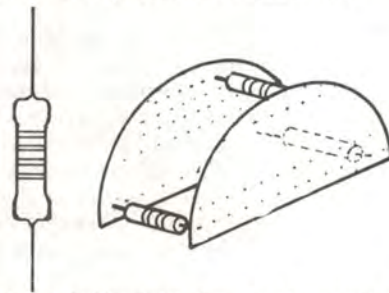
Cut the resistor leads as shown at left and then solder three resistors to two half-discs as shown to make a rigid assembly.
